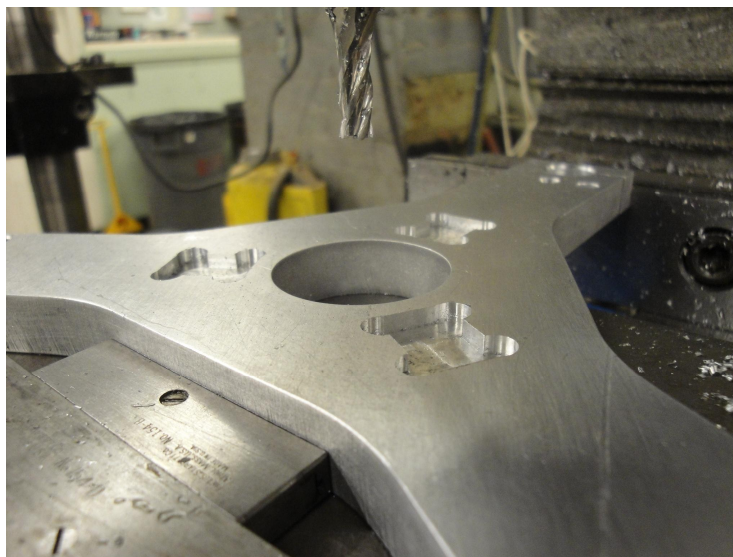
Pockets for a Kinematic Coupling were post-machined using a CNC mill after the part was Waterjetted.
